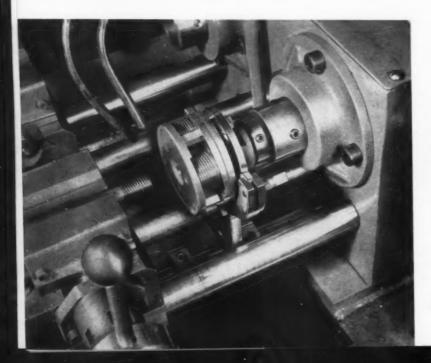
Three-roll threading attachment is a self-opening, end-feeding unit similar to a pull-off type die-head. After engagement with the work, the rolls maintain their lead.
